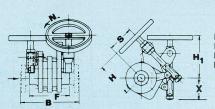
Flanged 300 lb. Fig. A5361 Flanged 600 lb. Fig. A5360 Screw End 600 lb. Fig. A5362 Socket Weld 600 lb.
